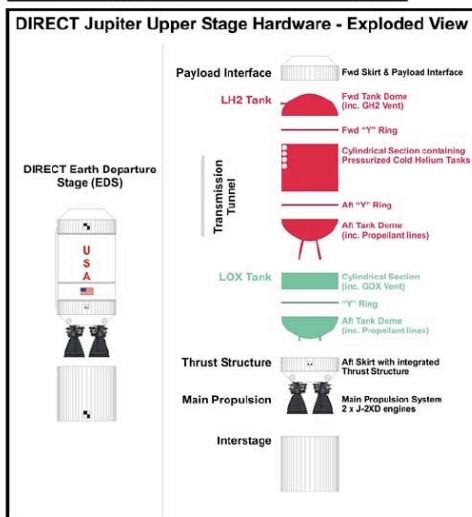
Jupiter Upper Stage Overall Specification and Assembly Breakout
